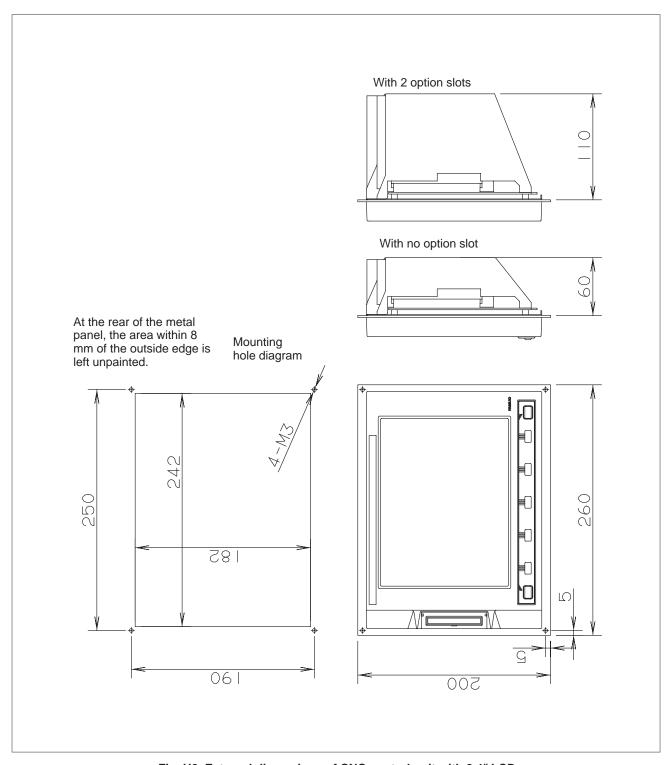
External dimensions of CNC control unit with 8.4" LCD
